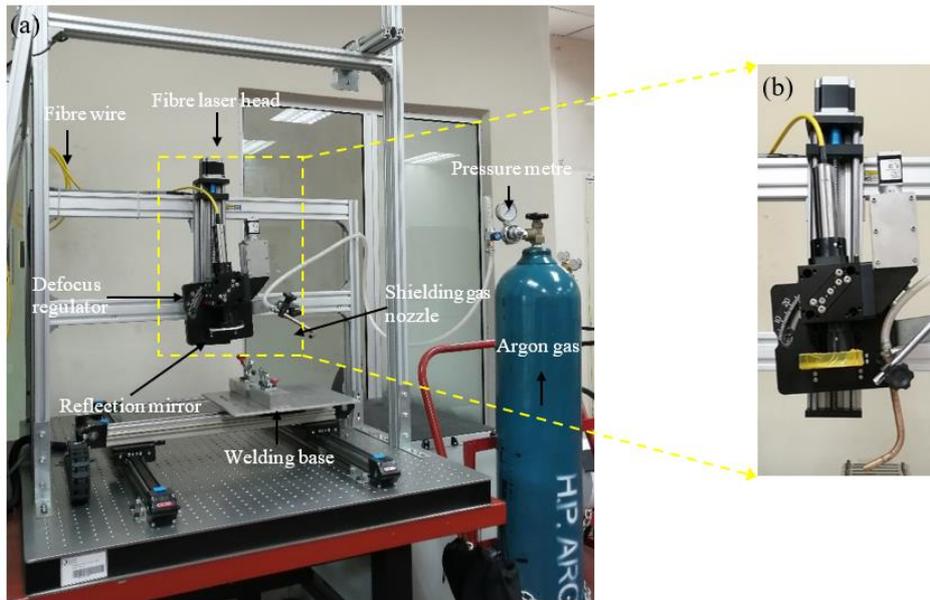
(a) Laser welding setup with complete installation equipment of welding process, (b) close-up of fibre laser head
